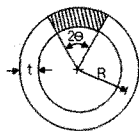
Schematic representation of pipe with circumferential through wall crack subjected to bending and tension.
